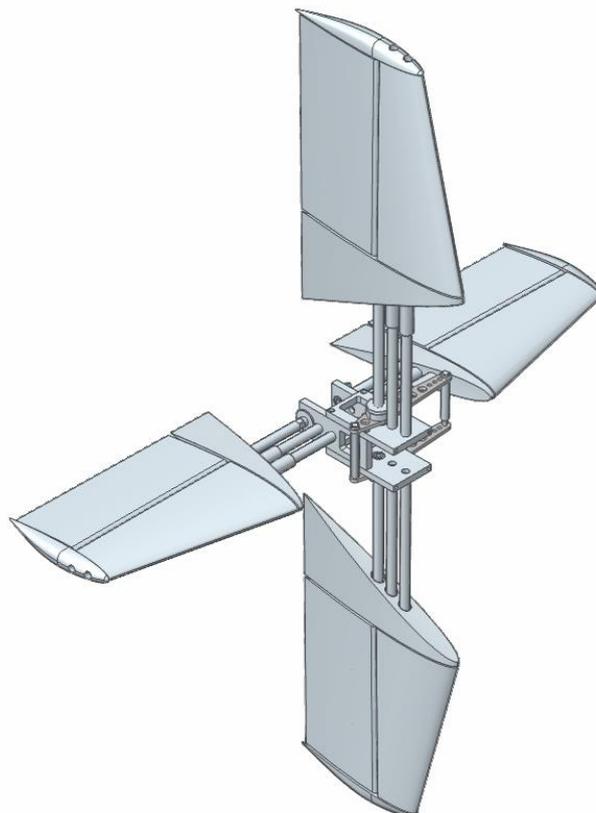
CAD model showing skog support tubes, steering tube and associated fittings
